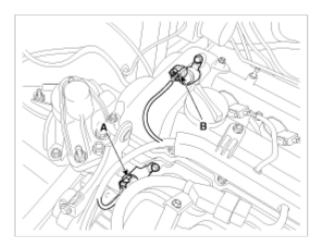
Identifying Intake And Exhaust Oil Control Valve Connectors Courtesy of HYUNDAI MOTOR AMERICA
